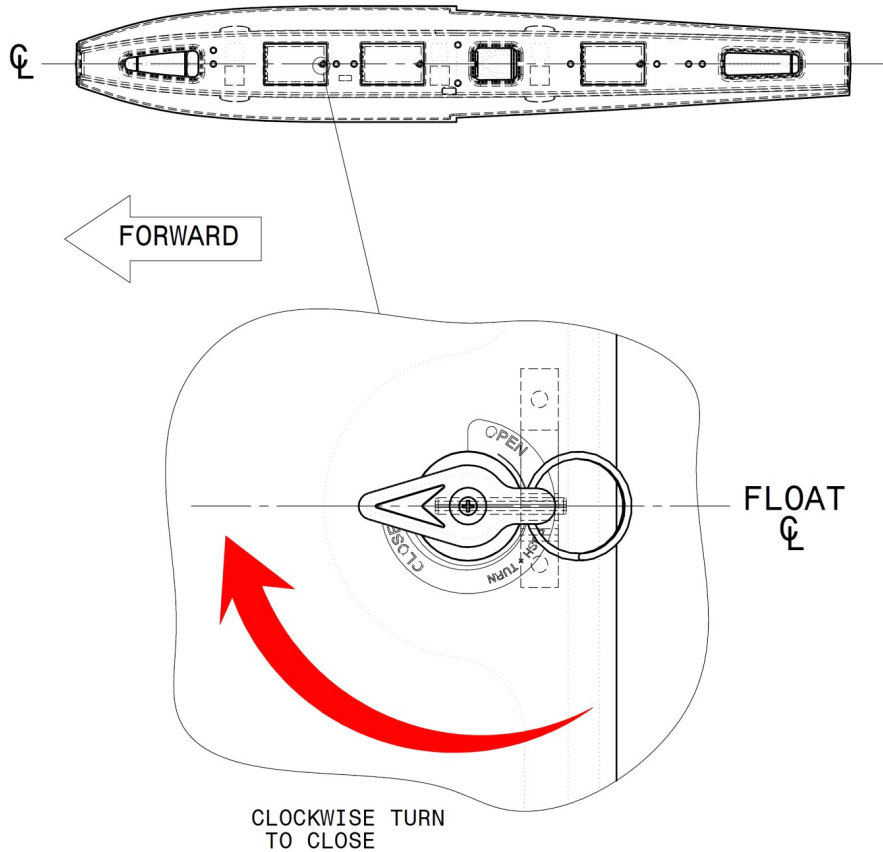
Pump-Out Cup, Plug and Access Panel
